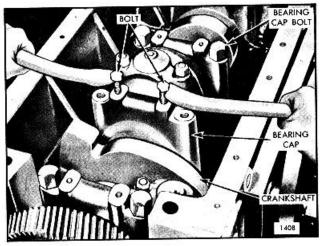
Removing Main Bearing Cap The lower main bearing shells have no oil grooves, therefore, the upper and lower bearing shells must not be interchanged.
